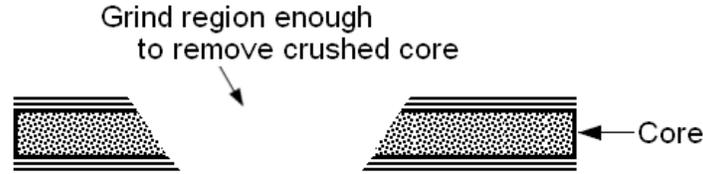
Section of the Composite after Grinding to Remove Damaged Area
